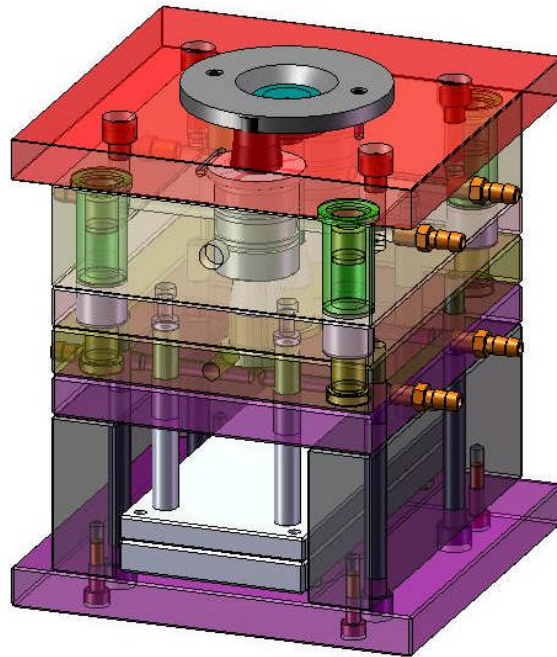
The 3D solid modelling test mould for plastic injection moulding
